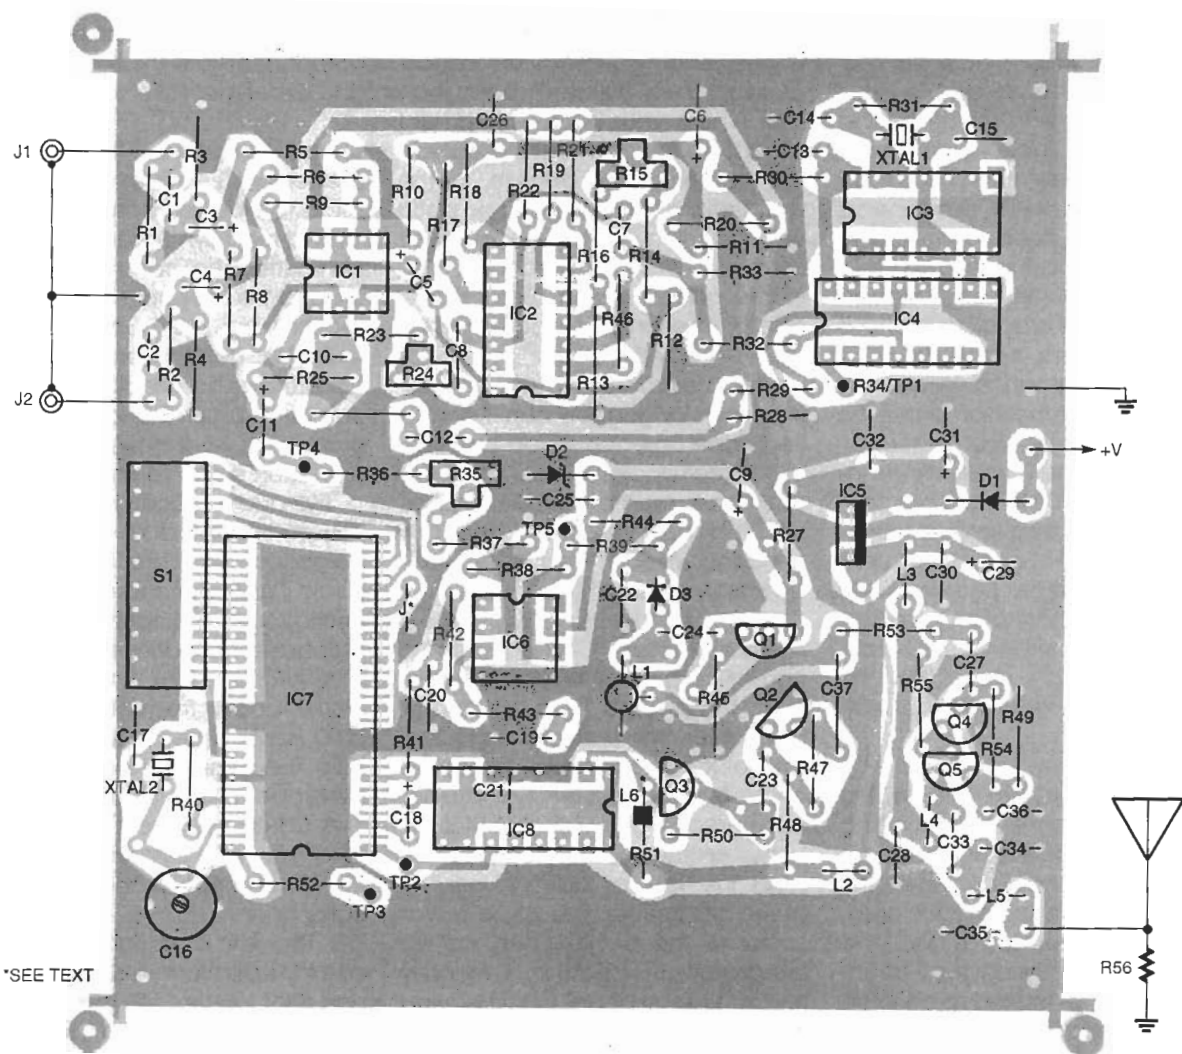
The transmitter is easily built on a single PC board. A single surface-mount capacitor is soldered to the bottom side of the board. Be sure to solder the component leads on both sides of the board where pads are provided on the component side.
